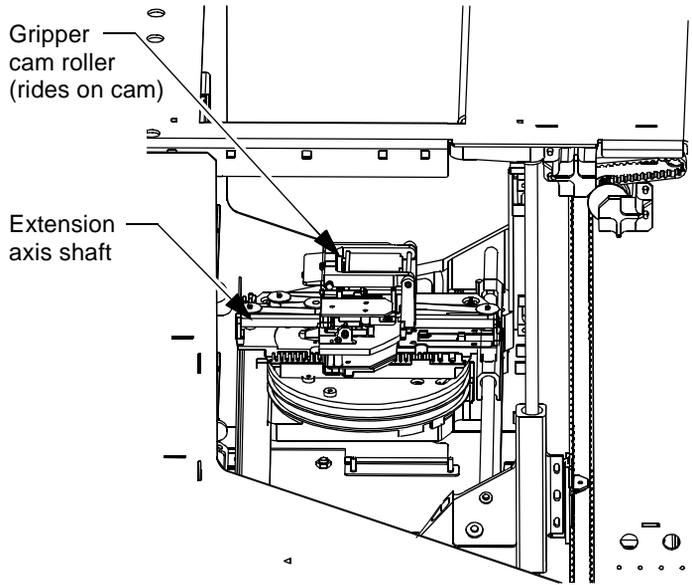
Cleaning and Lubricating the Extension Axis and Gripper
